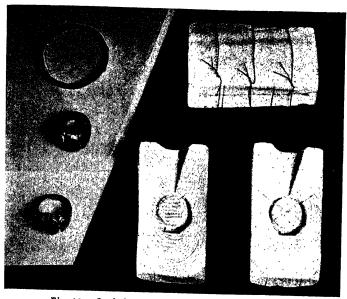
Cuttle-bone mold, tin pattern and finished ring
